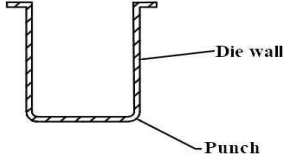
Cross-sectional drawing of die-set for drawing and bending
